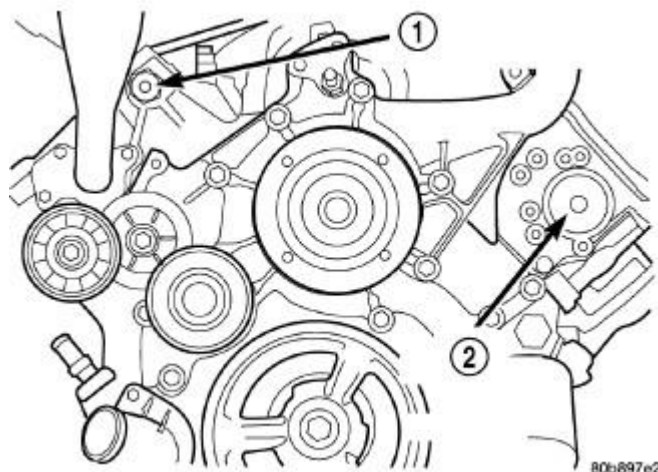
Access Plugs From Left And Right Cylinder Heads
